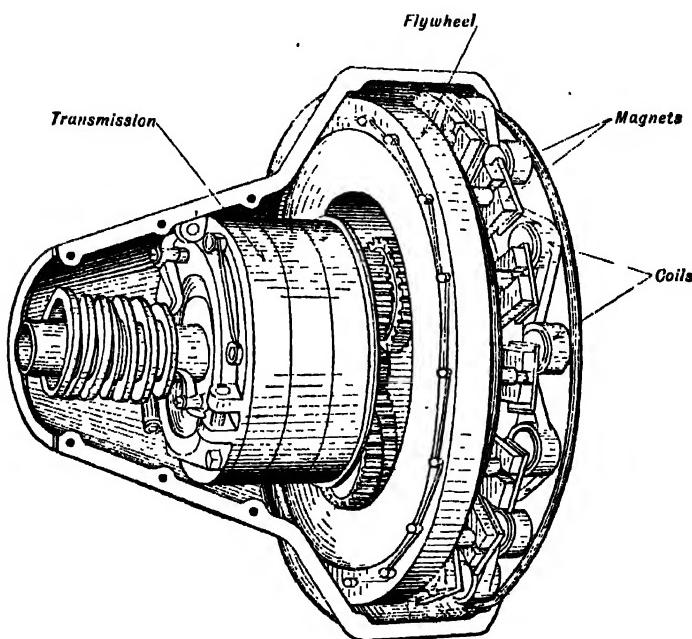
Showing Coils and Magnets that Comprise Ford Magneto and their Relation to the Flywheel and Transmission Gear.
